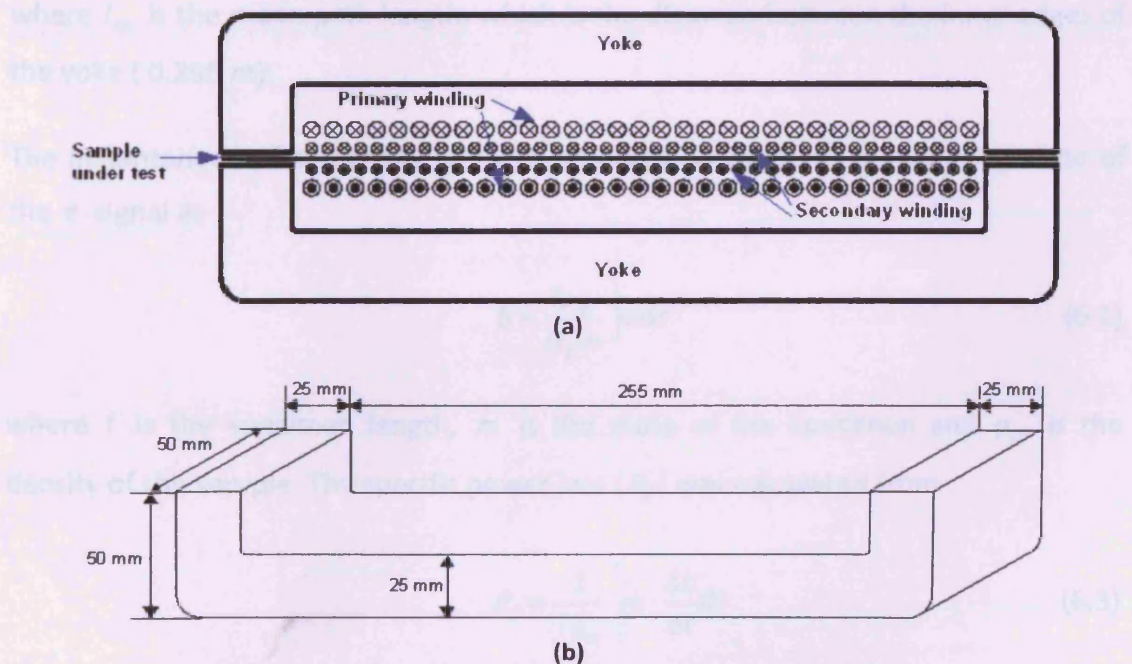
Single strip tester: (a) side view, and (b) physical dimensions of a flux closure yoke
